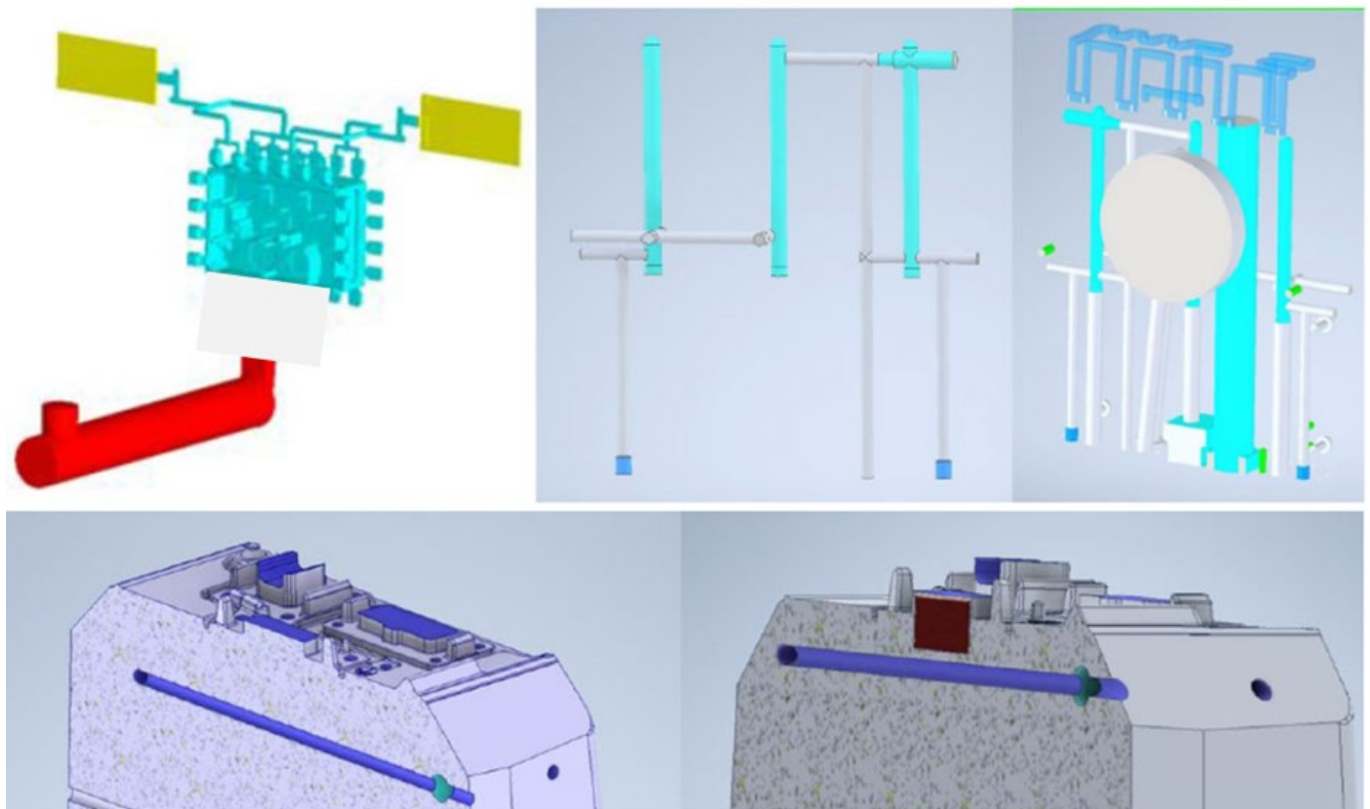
Casting simulation of the tool (top left) were employed to design a better cooling concept employing optimized cooling channels and copper inserts (top right, bottom).
